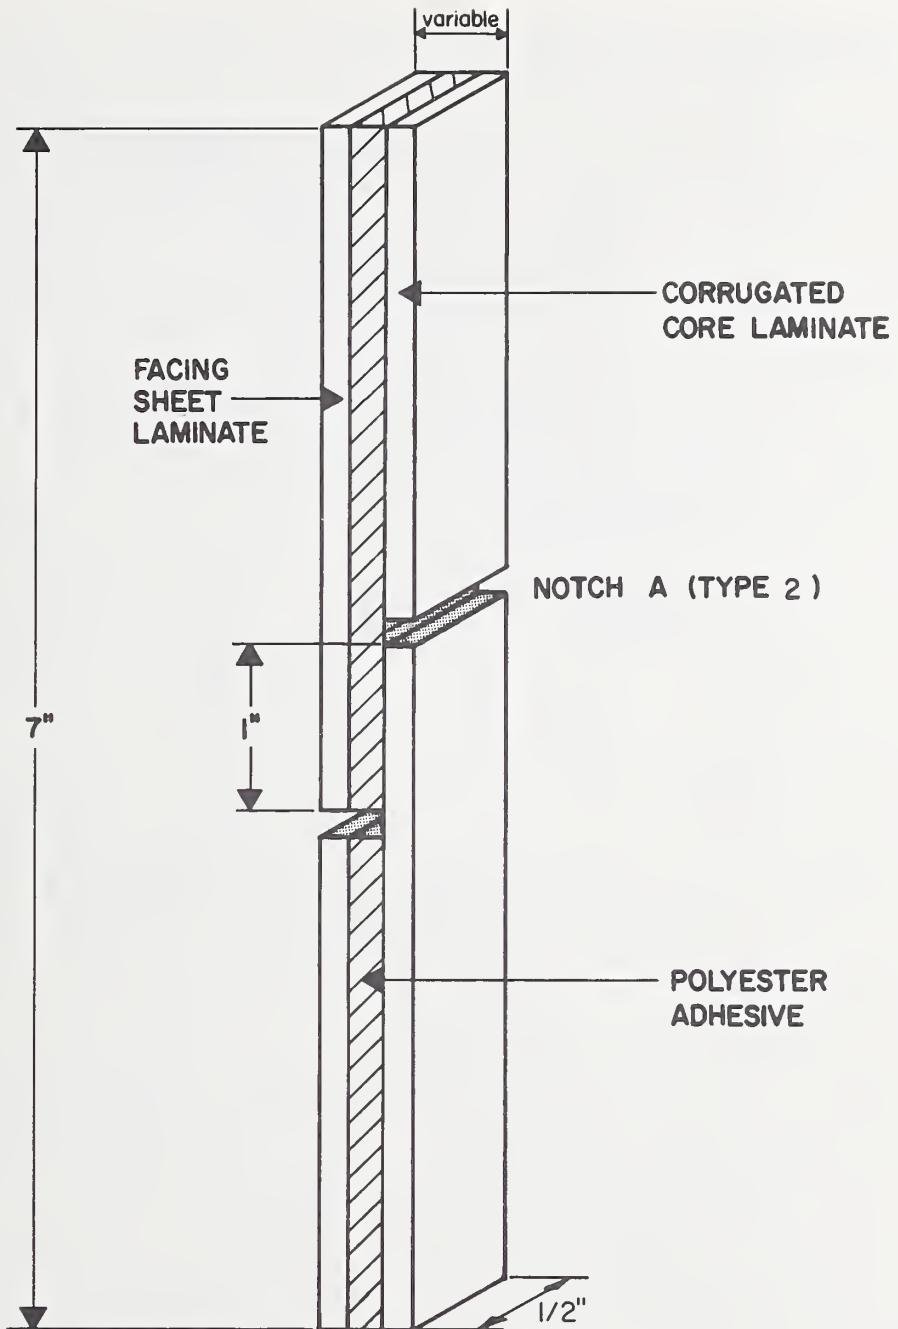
Adhesive bond specimen with notch type 2.
